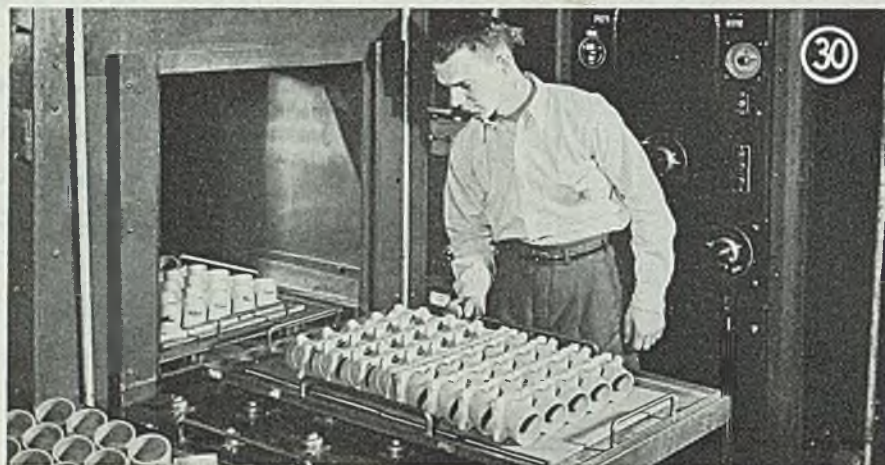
As a final check on quality, trays of castings pass through automatic GE x-ray equipment. The x-ray head for this machine is fixed at a focal distance of 50 in. and completely enclosed in a lead-lined cabinet. A ball-bearing conveyor table makes it possible for one man to handle the complete operation
